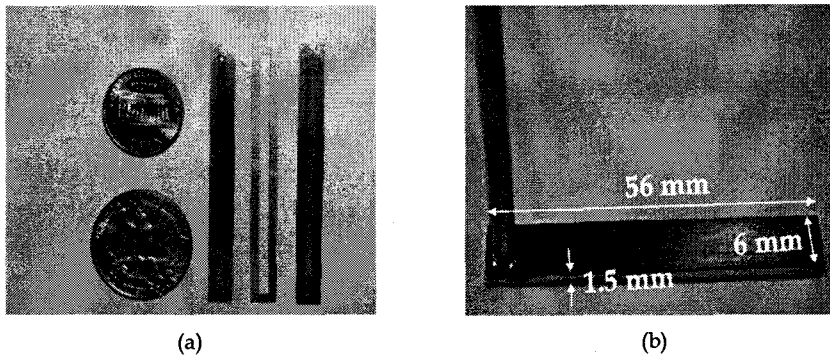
Photographs for (a) the top, middle, and bottom plates before laser-welding for packaging, and (b) the completed flat micro heat pipe with a STS-304 tube for the supply of working fluid
